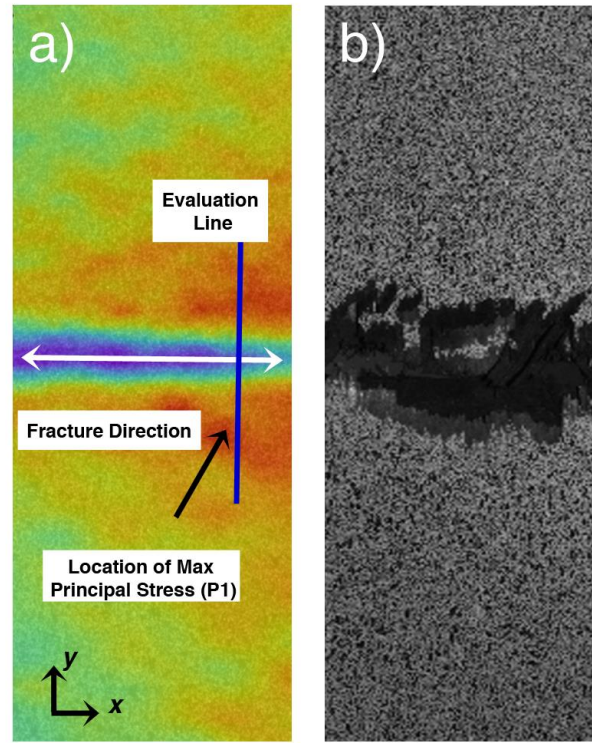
An unnotched tension specimen with center wrinkle. In a) full-field image of maximum principal strain used to determine the evaluation line perpendicular to the fracture direction; b) shows the speckle pattern and the specimen after final fracture[149]
